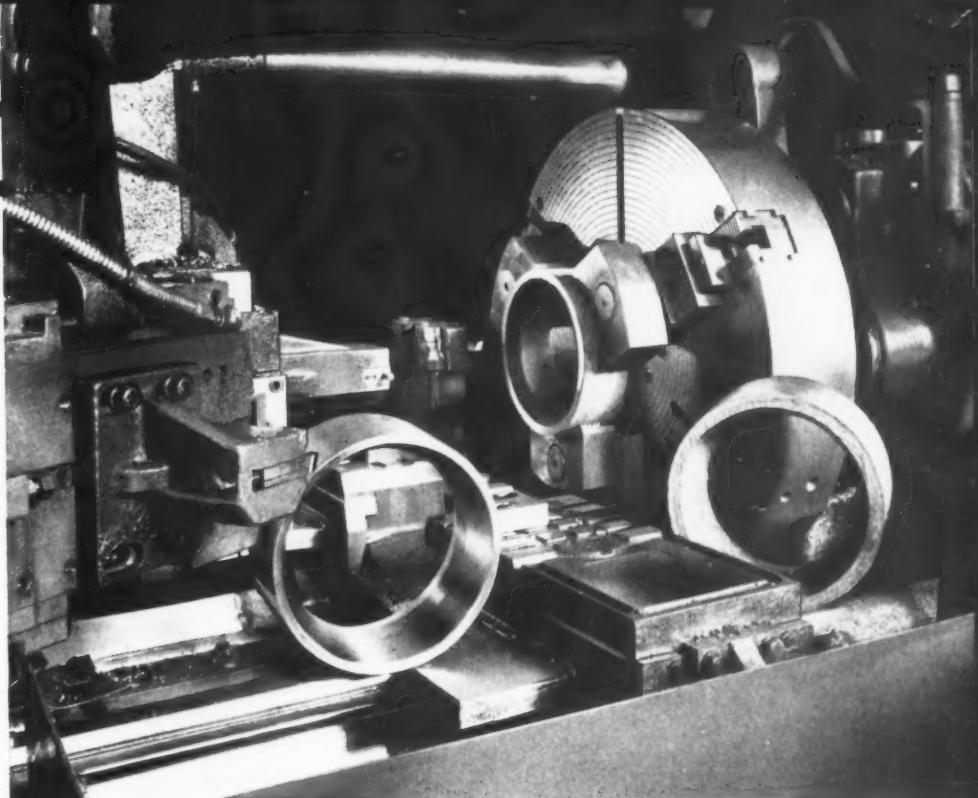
Circular Form Cutters on the Cross-slide of Another Automatic are Used in Conjunction with Turret Tools for Machining External Surfaces of Locomotive Bearing Cones
